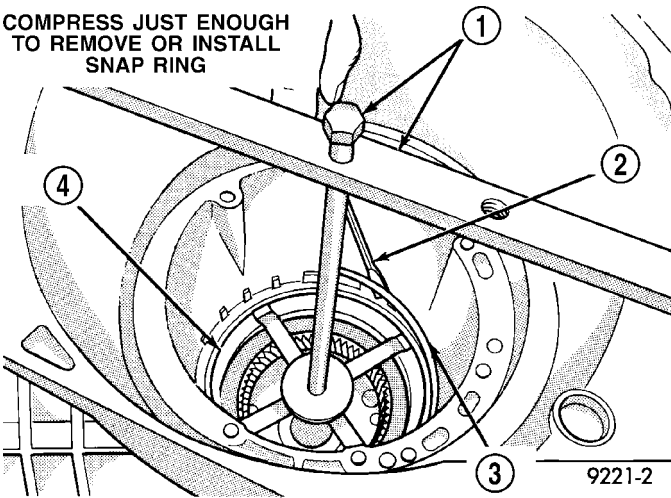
Install 2/4 Clutch Retainer Snap Ring
